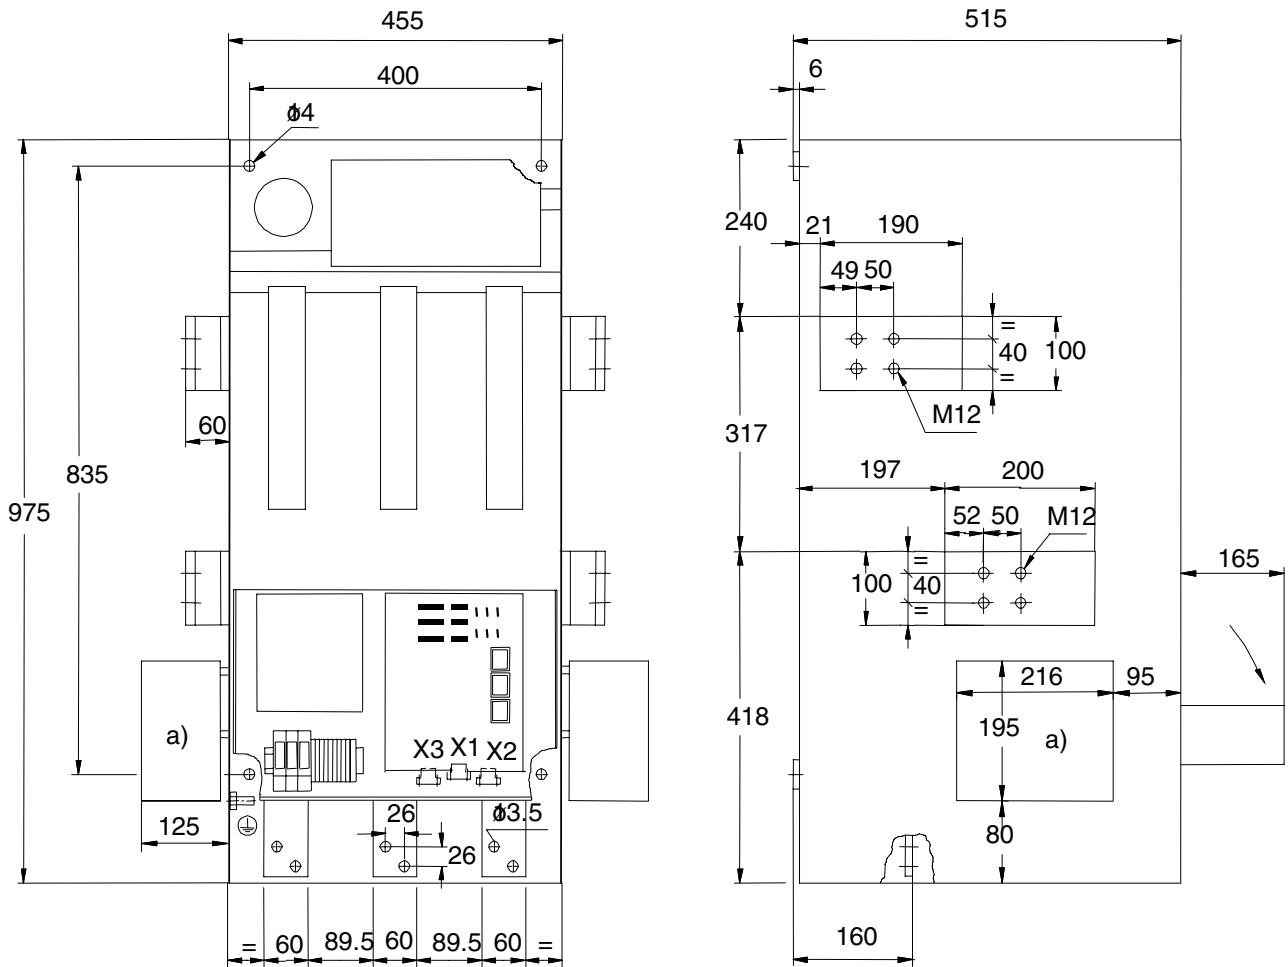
Dimensions, weight and drilling plan for Type 250/450A
